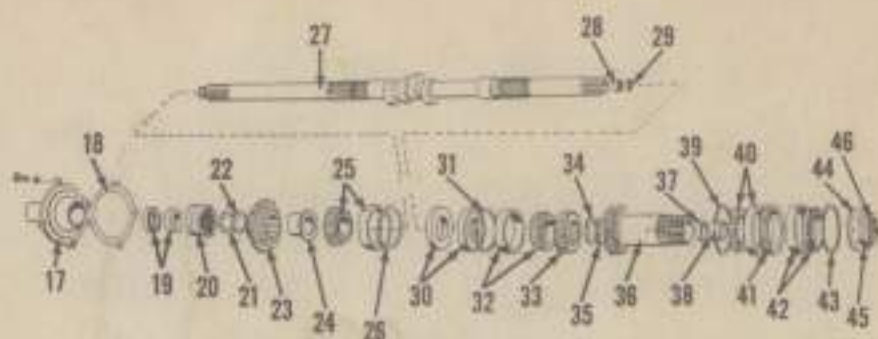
Exploded view of the clutch shaft and associated parts used on D-17 tractors prior to tractor serial No. D17-75001. Lip seals (19) face toward rear. Oil seals (30) are not used after tractor serial number 38895. Refer to text.
